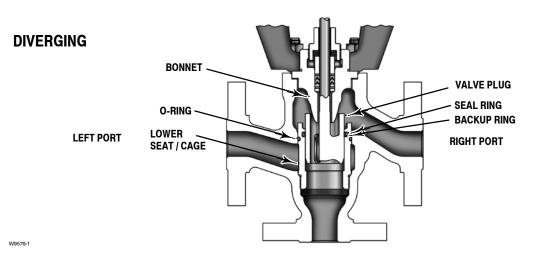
Bottom Port Common Construction Details for Diverging Constructions
